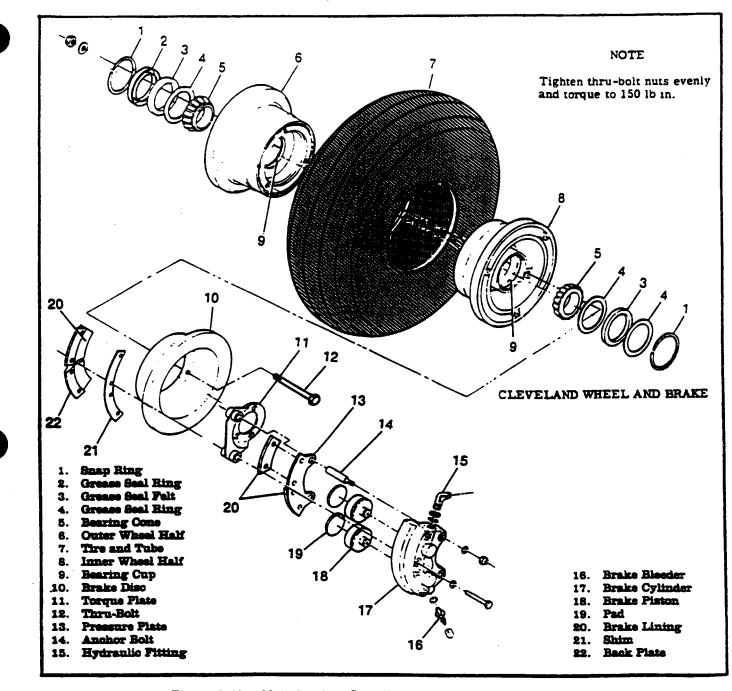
Main Landing Gear Wheel. Tire and Brake Assembly
